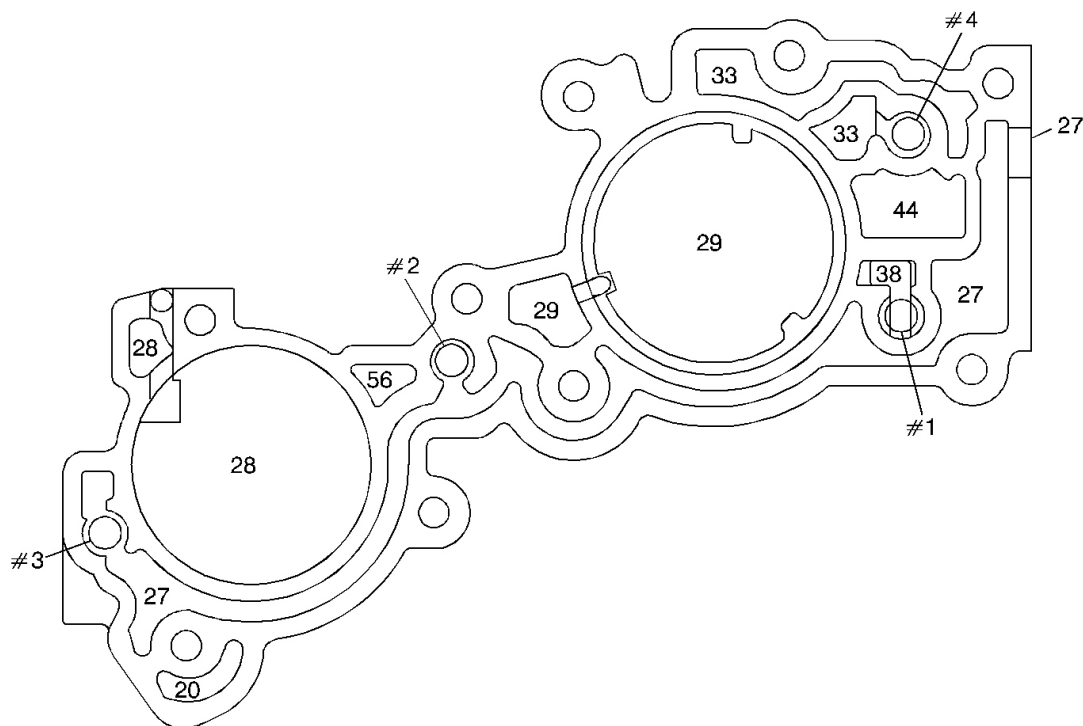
Accumulator Housing Fluid Passages (Lower Channel Plate Side)
